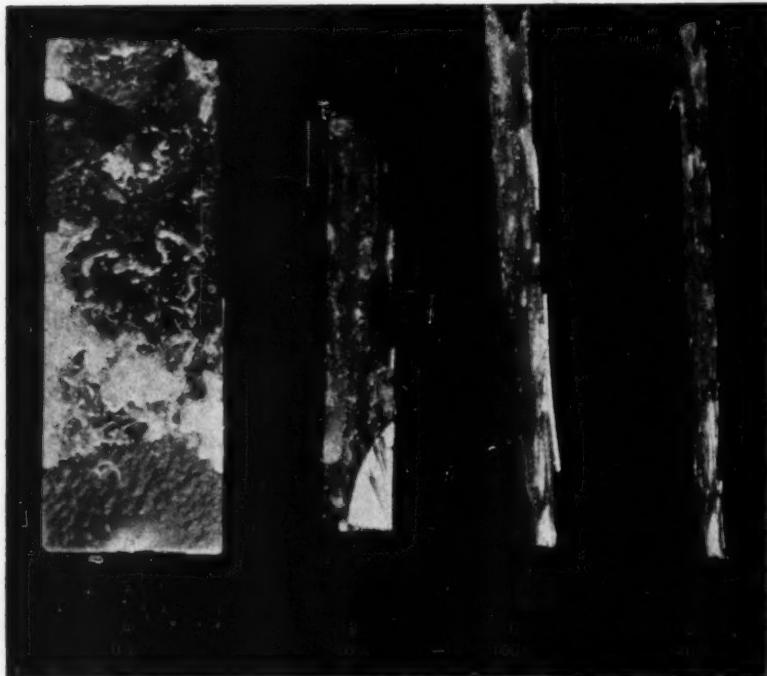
(above)—Top view of fracture surfaces of heat-resistant acrylic tensile specimens with varying degrees of biaxial stretching. Note mirror areas in lower right hand corner of stretched and in center of bottom of unstretched specimen.
